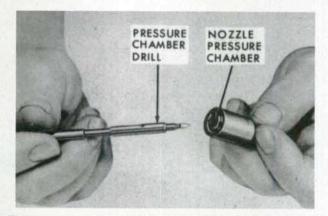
Clean nozzle tip cavity with pressure chamber drill.
